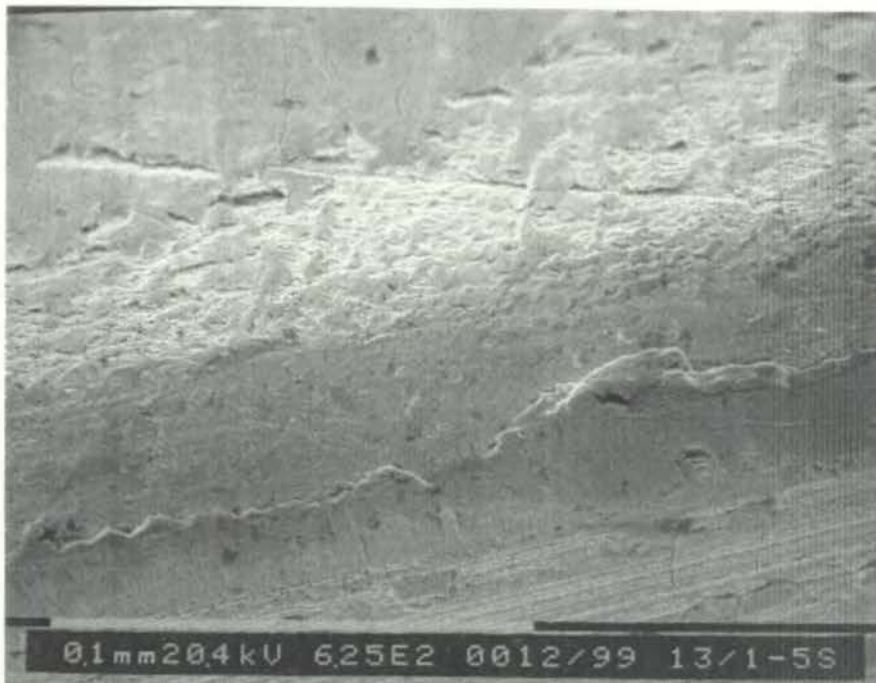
45 Magnified view of the rake face of KMF tool in Figure 7.44, showing rake face pitting and adhered workpiece material
